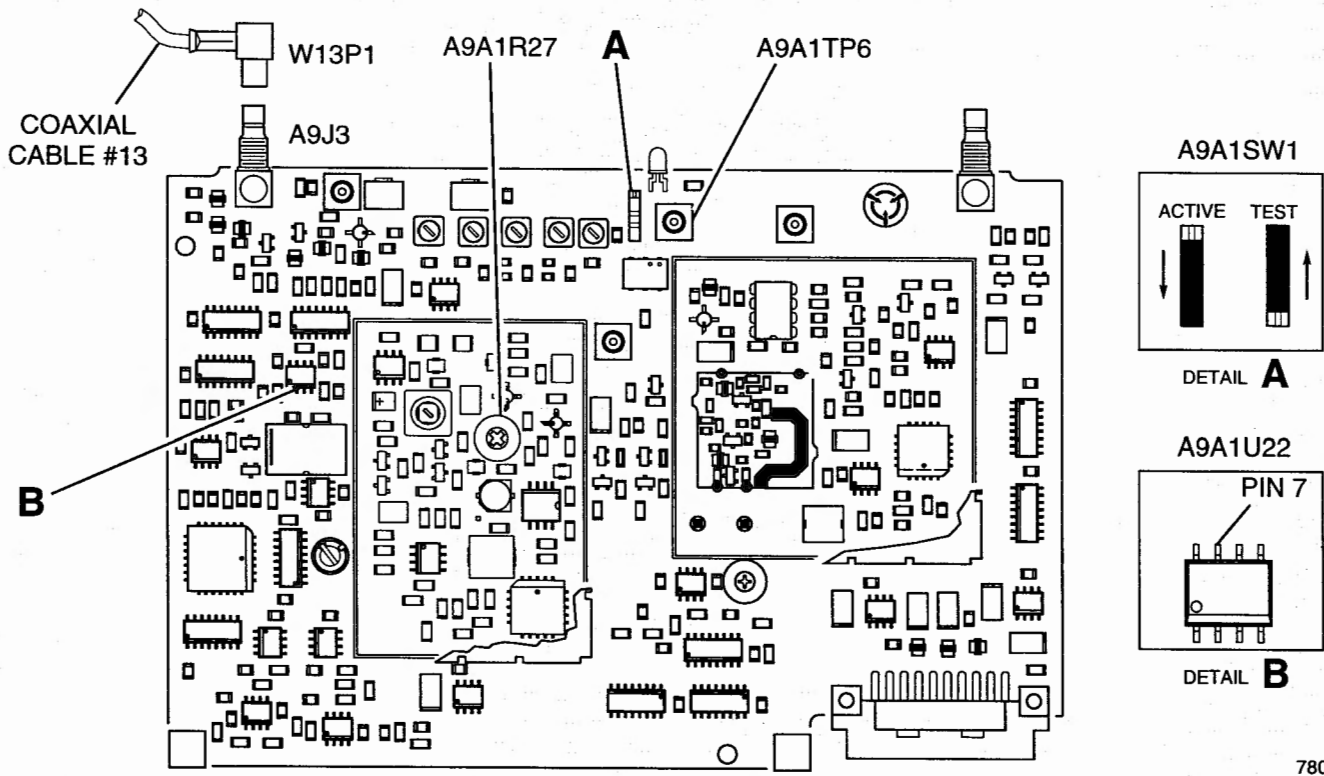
90 MHz Generator PC Board Assembly (78A1A9A1), Revision E
